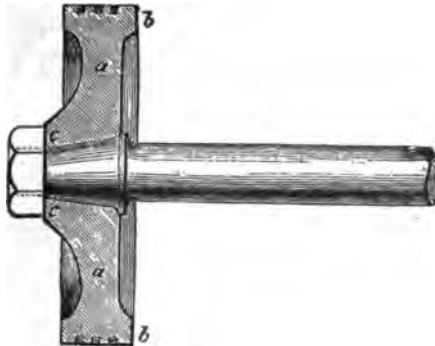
The Piston of a small double-acting steam engine, showing method of connecting the piston rod, and the position of the packing rings. The parts are: *a, a*, the body of the piston; *b, b*, the circumference bearing the packing rings; *c, c*, the central boss receiving the coned end of the rod.
